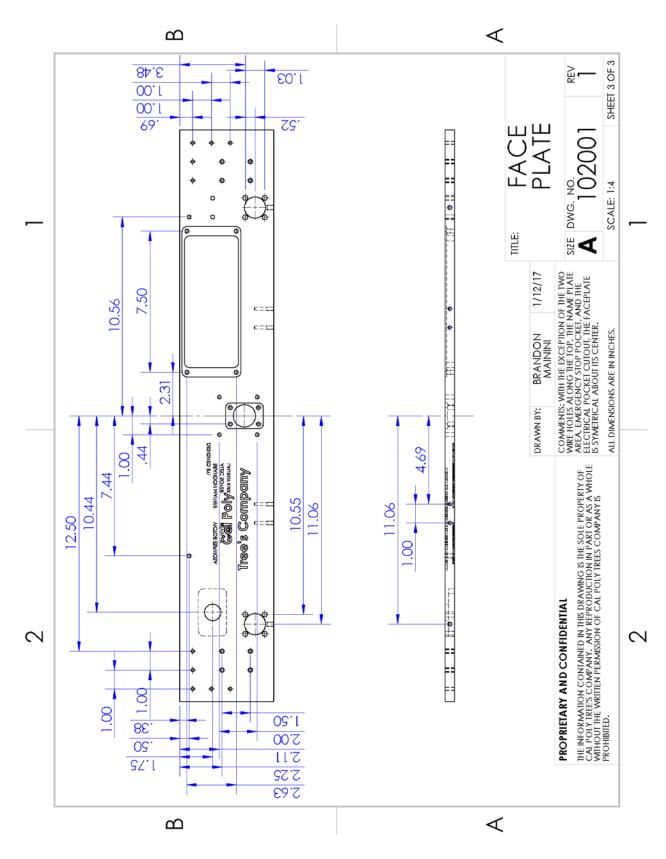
Face Plate Detail Drawing Sheet 3 of 3
